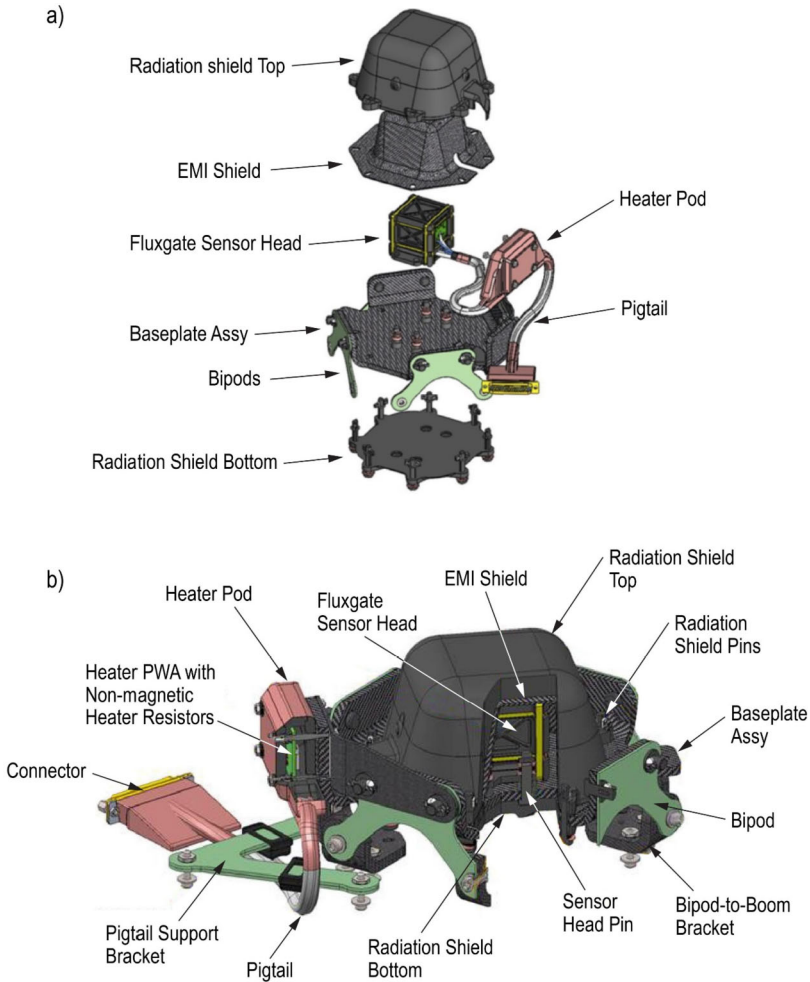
ECM fluxgate sensor assembly, complete with boom interfacing structure and shield covers. Figure (a) shows an exploded view, while (b) shows the complete sensor assembly in flight configuration, with cutaways to show the heater board inside the heater pod and the fluxgate sensor head inside its shielding
